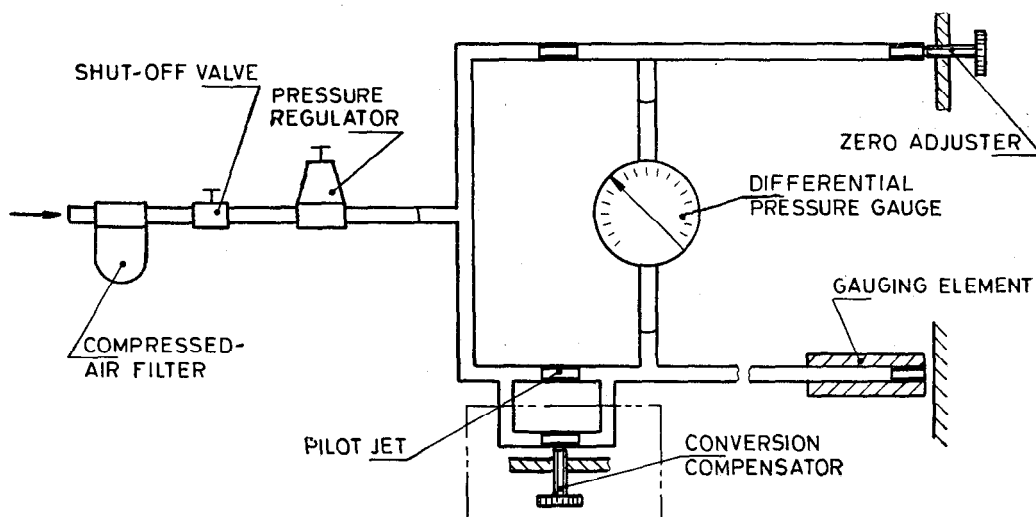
INDICATING INSTRUMENT USING THE PRESSURE MEASURING METHOD WITH A DIFFERENTIAL PRESSURE GAUGE
